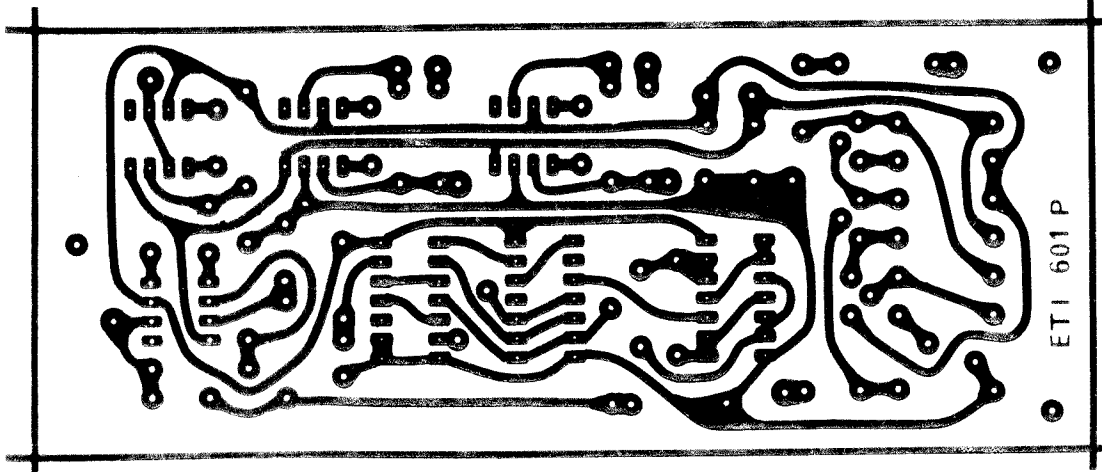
Printed circuit board layout for the auxiliary board. Full size 142 x 57 mm.
